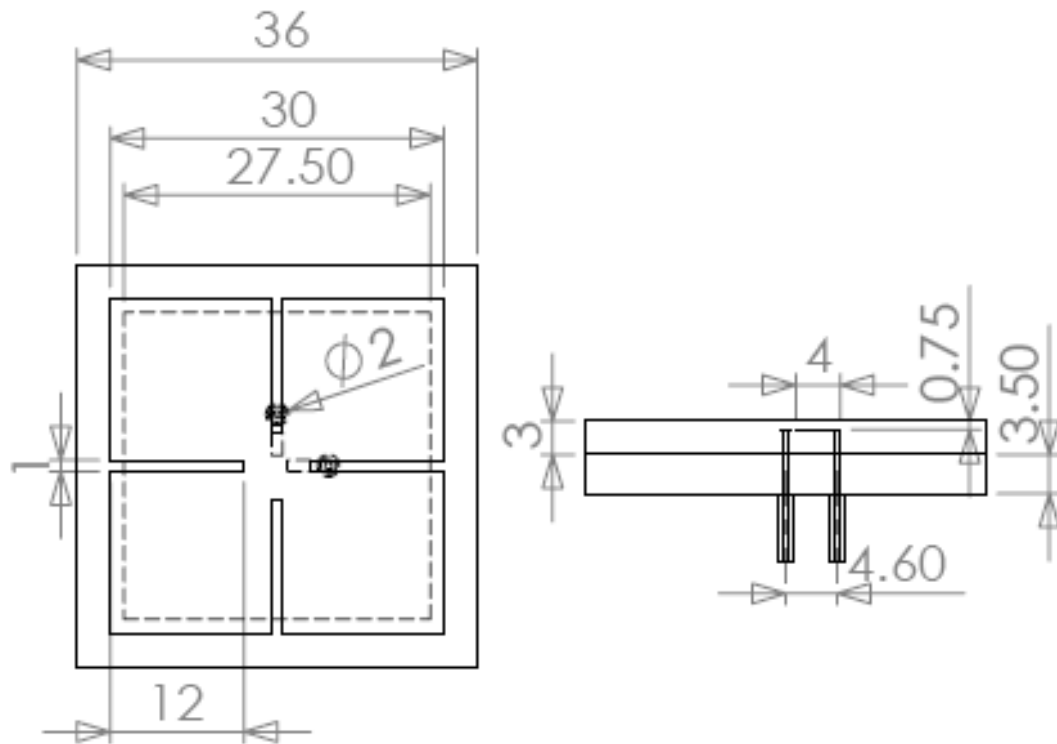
Dimensioned drawing for the optimized slotted, stacked patch antenna. All dimensions are in millimeters.
